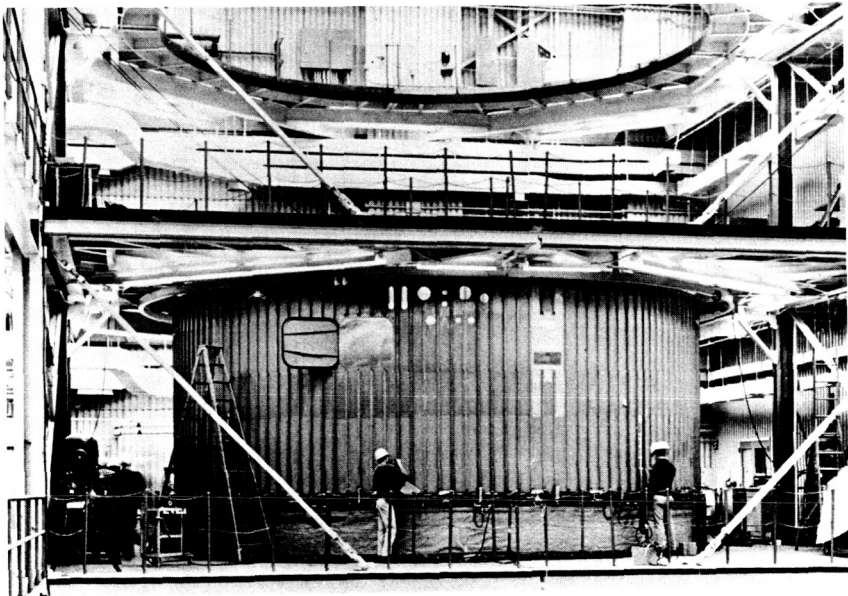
S-II bulkhead and skirt assembly, Seal Beach, Calif.
